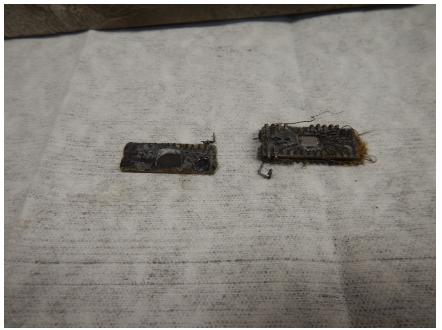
Chip showing the cover had separated exposing the inside: (Honeywell)
